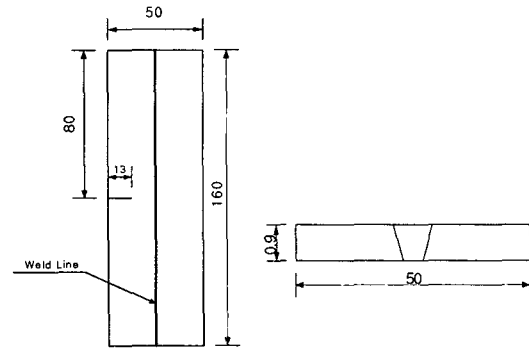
Dimension of specimens for fatigue crack propagation
